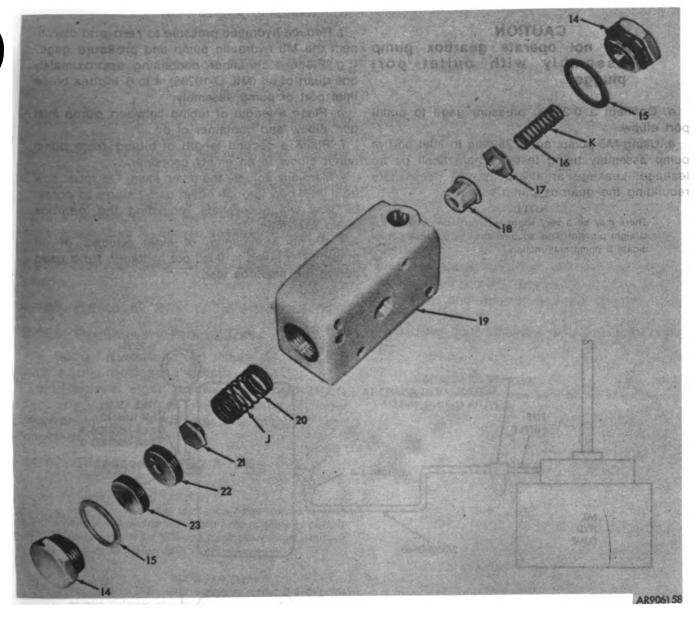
Traversing gearbox pump wear points (2 of2).
